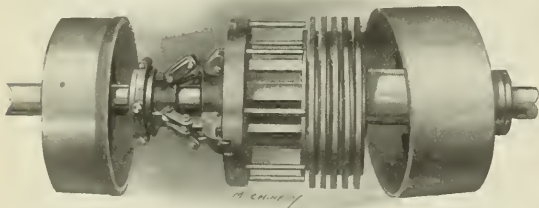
Moore & White 21-inch High-speed Friction Clutch Pulley partially disassembled
